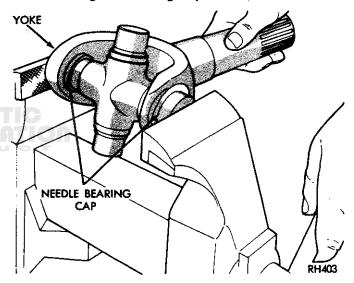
Bearing Cap & Spider Installation LEFT (DISCONNECT) AXLE SHAFT SERVICE
